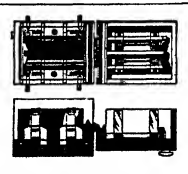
A. B. Barnes' sliding plane, showing a mechanical device with a sliding component and a support structure.
